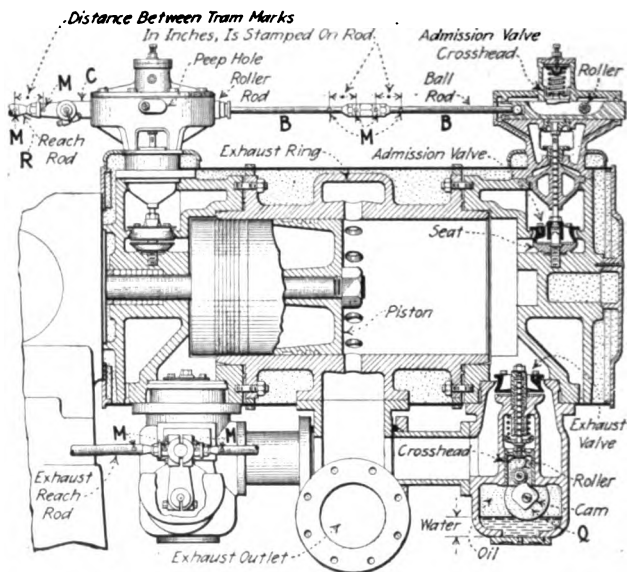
Longitudinal section through cylinder of "Ames controlled-compression una-flow" engine.
